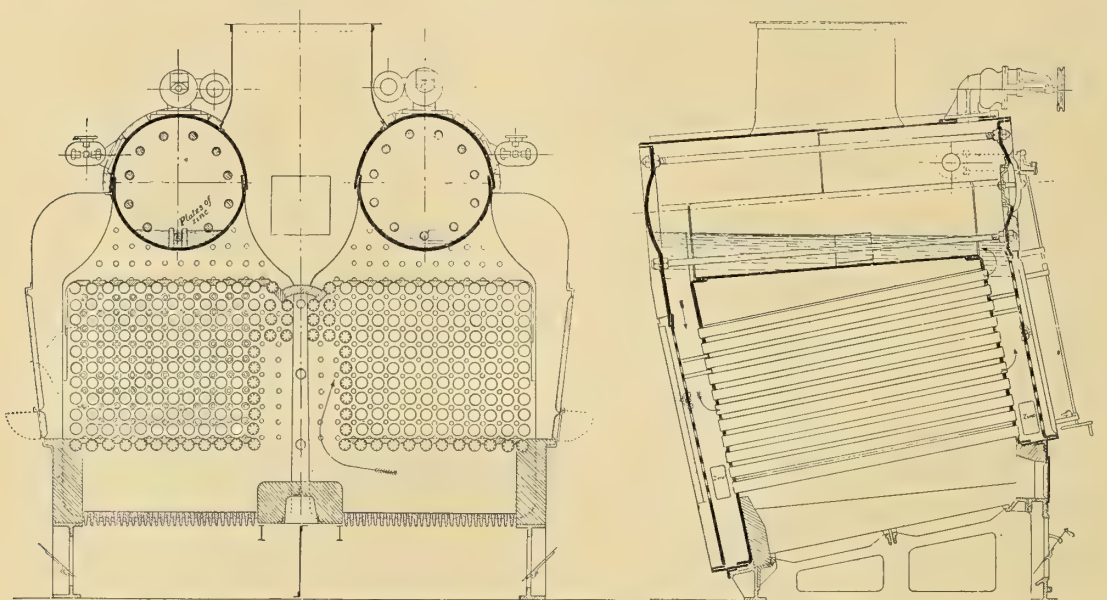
D'ALLEST WATER-TUBE BOILER.
